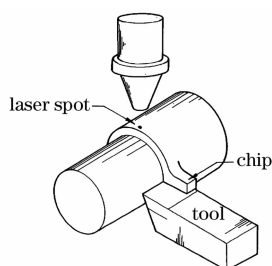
Setup LAM with laser beam normal to workpiece surface^[15]
